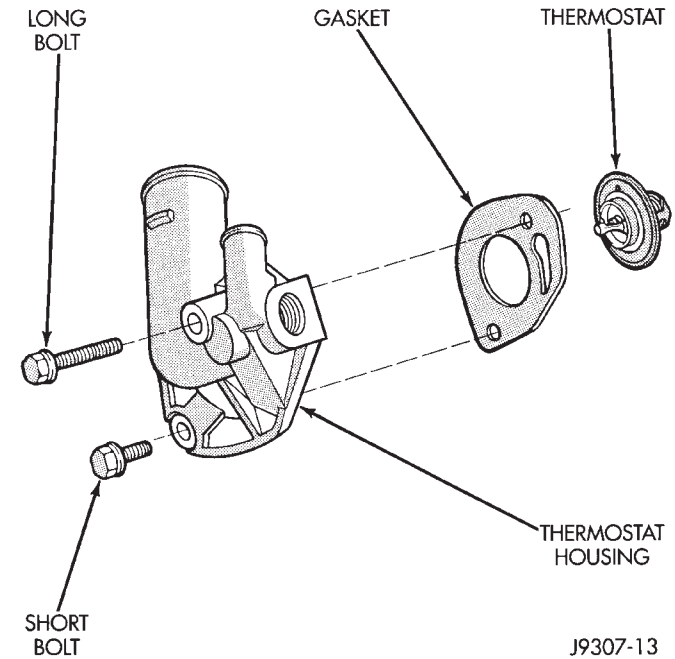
Thermostat Removal/Installation—4.0L Engine
